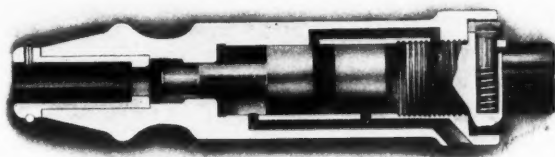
Sectional View of One-inch Pneumatic Wood-carving Tool
